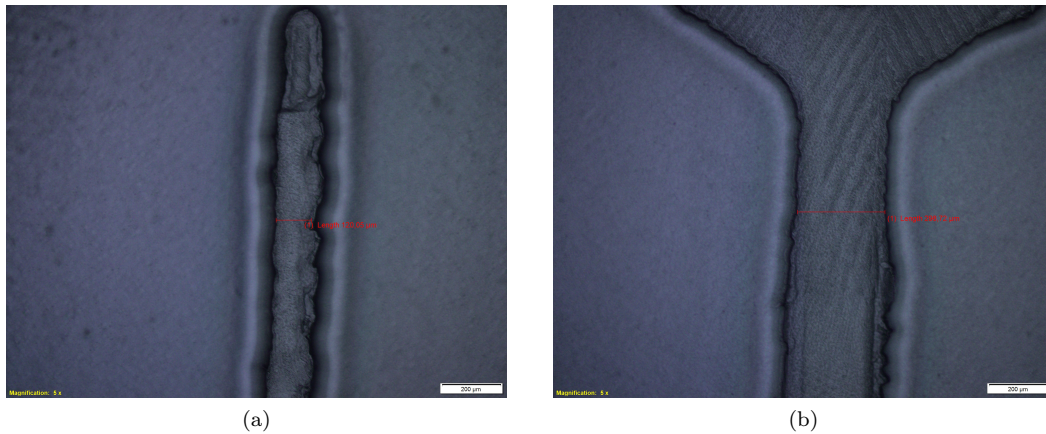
These images show the burring with (a) being a thinner channel with more burring and (b) a wider channel with less burring.
